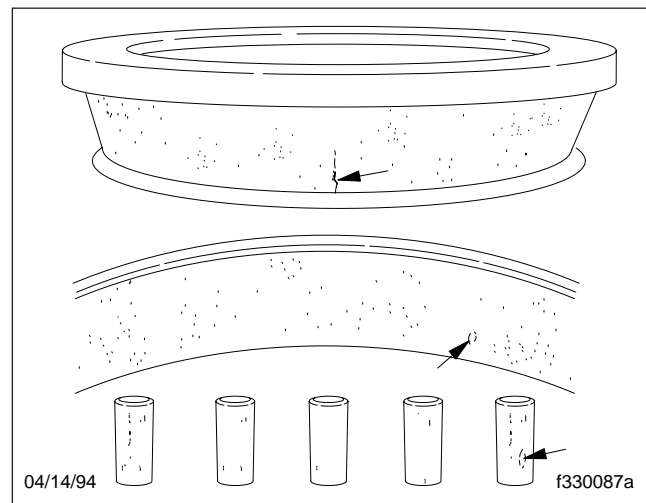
, Indentations, Cracks, or Breaks in Bearing Surfaces
